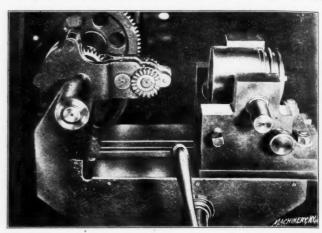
Special Machine for Milling the Space between the Wrist-pin Bosses between V-jaws with plugs inserted in each end of the reamed wrist-pin hole. The mechanism operating the mills is too plainly indicated to need further explanation. Just before the last inspection, the pistons are placed in the jig shown at B, Fig. 8, and the wrist-pin hole is carefully hand-reamed with a pilot reamer.
